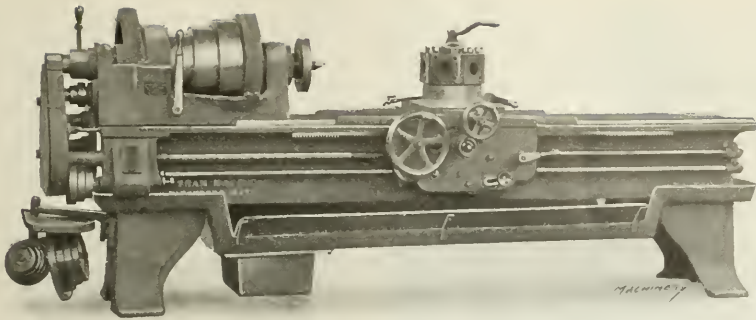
Putnam 22-inch Lathe with Heavy Turret on Special Carriage
